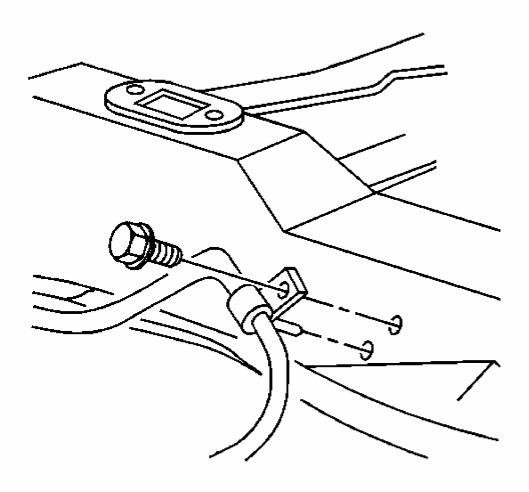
View Of Vent Clamp Bolt Courtesy of GENERAL MOTORS CORP.
